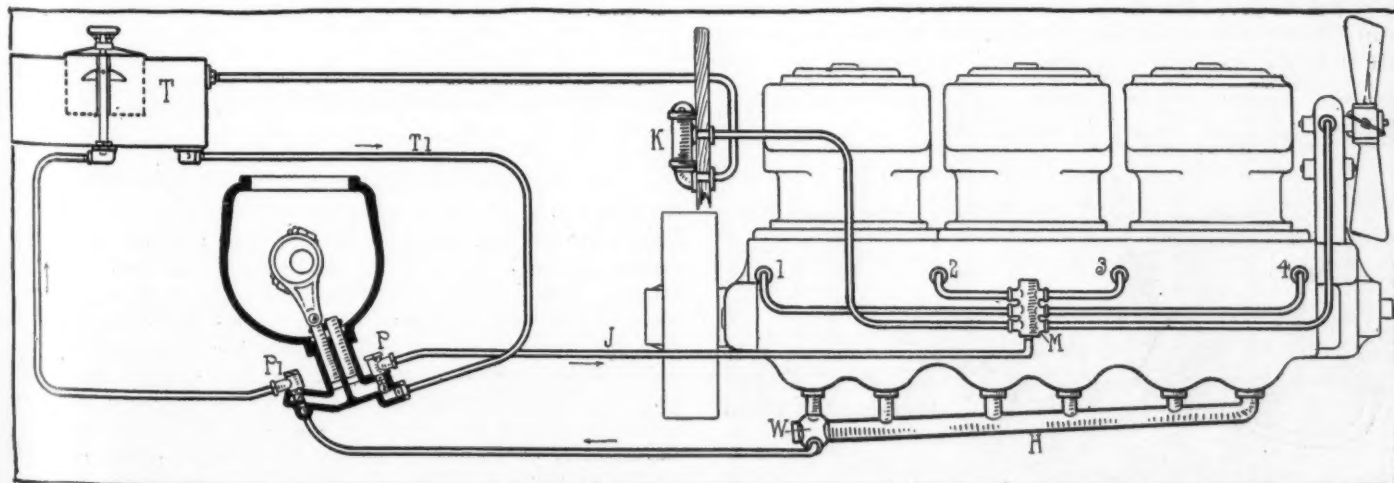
WINTON'S NEW DOUBLE PUMP LUBRICATING MECHANISM
